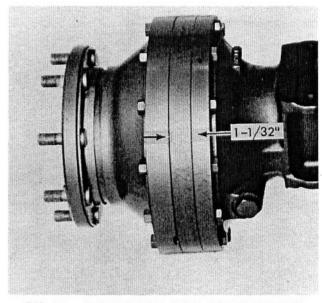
NARROW RING GEAR AXLE PLANETARY IDENTIFICATION (FRONT VIEW)
